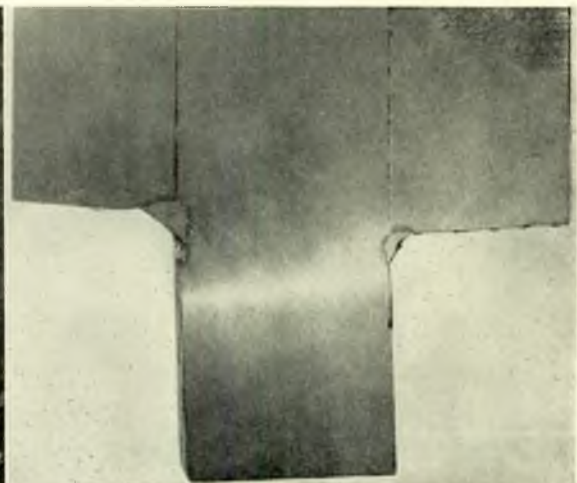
Section across butt-strap, showing fillet welds
